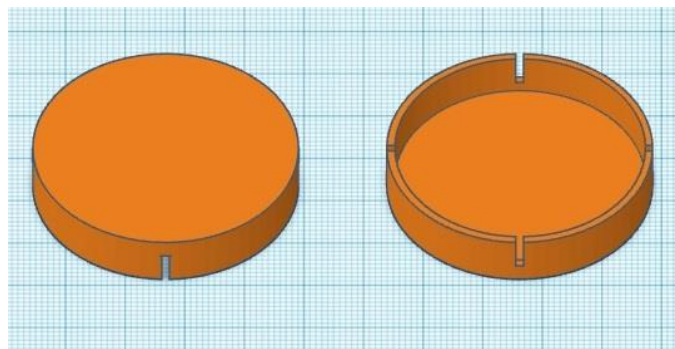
Cap for the Viewing Head Mounting Dovetail
